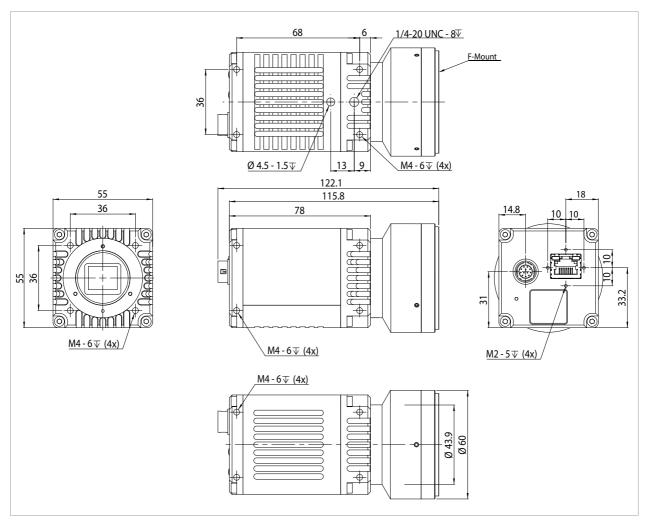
Goldeye G, dimensions with F-Mount lens adapter
